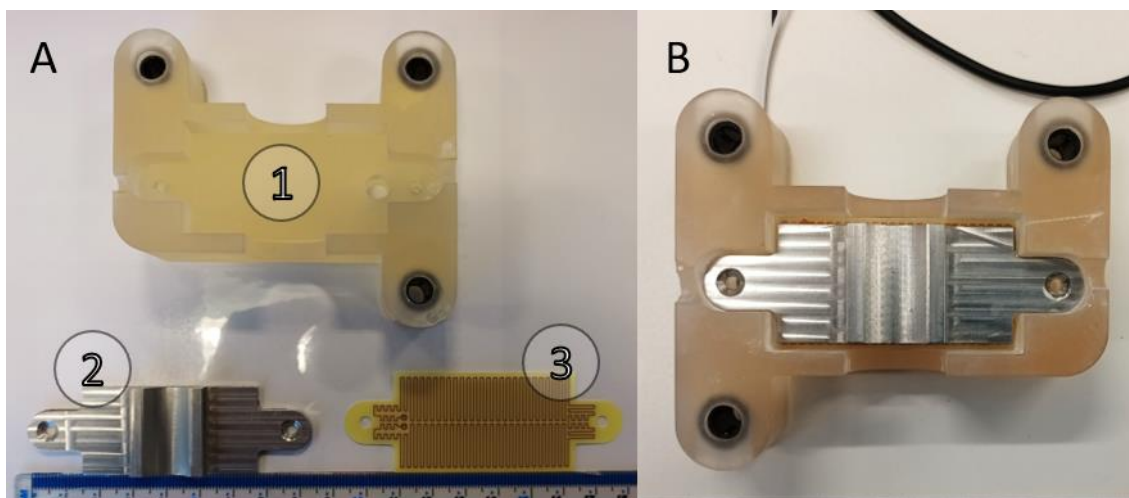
Final Design Idea: Sample Preparation Device (Heater Block Assembly)
